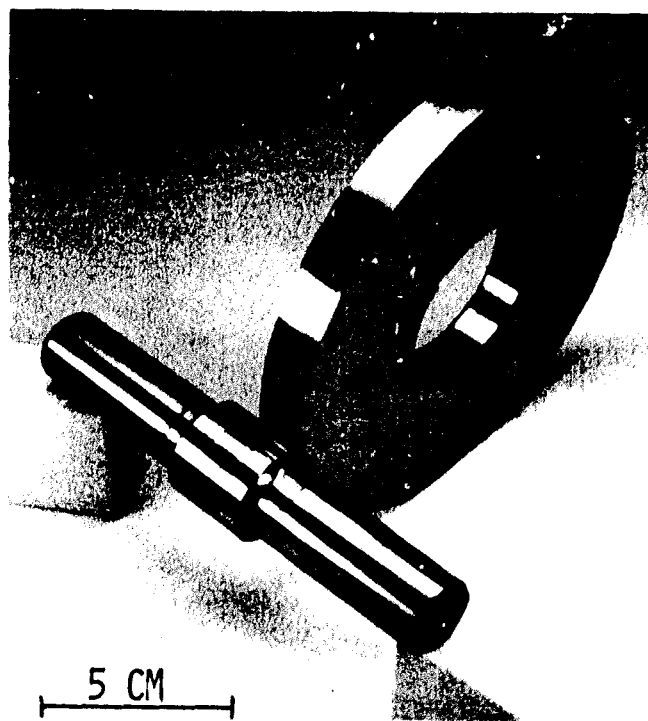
Test and load rollers in the geared roller test machine. The load roller is 127 mm in diameter and has a 317.5-mm radius crown. The 25.4-mm diameter test roller is not crowned.
